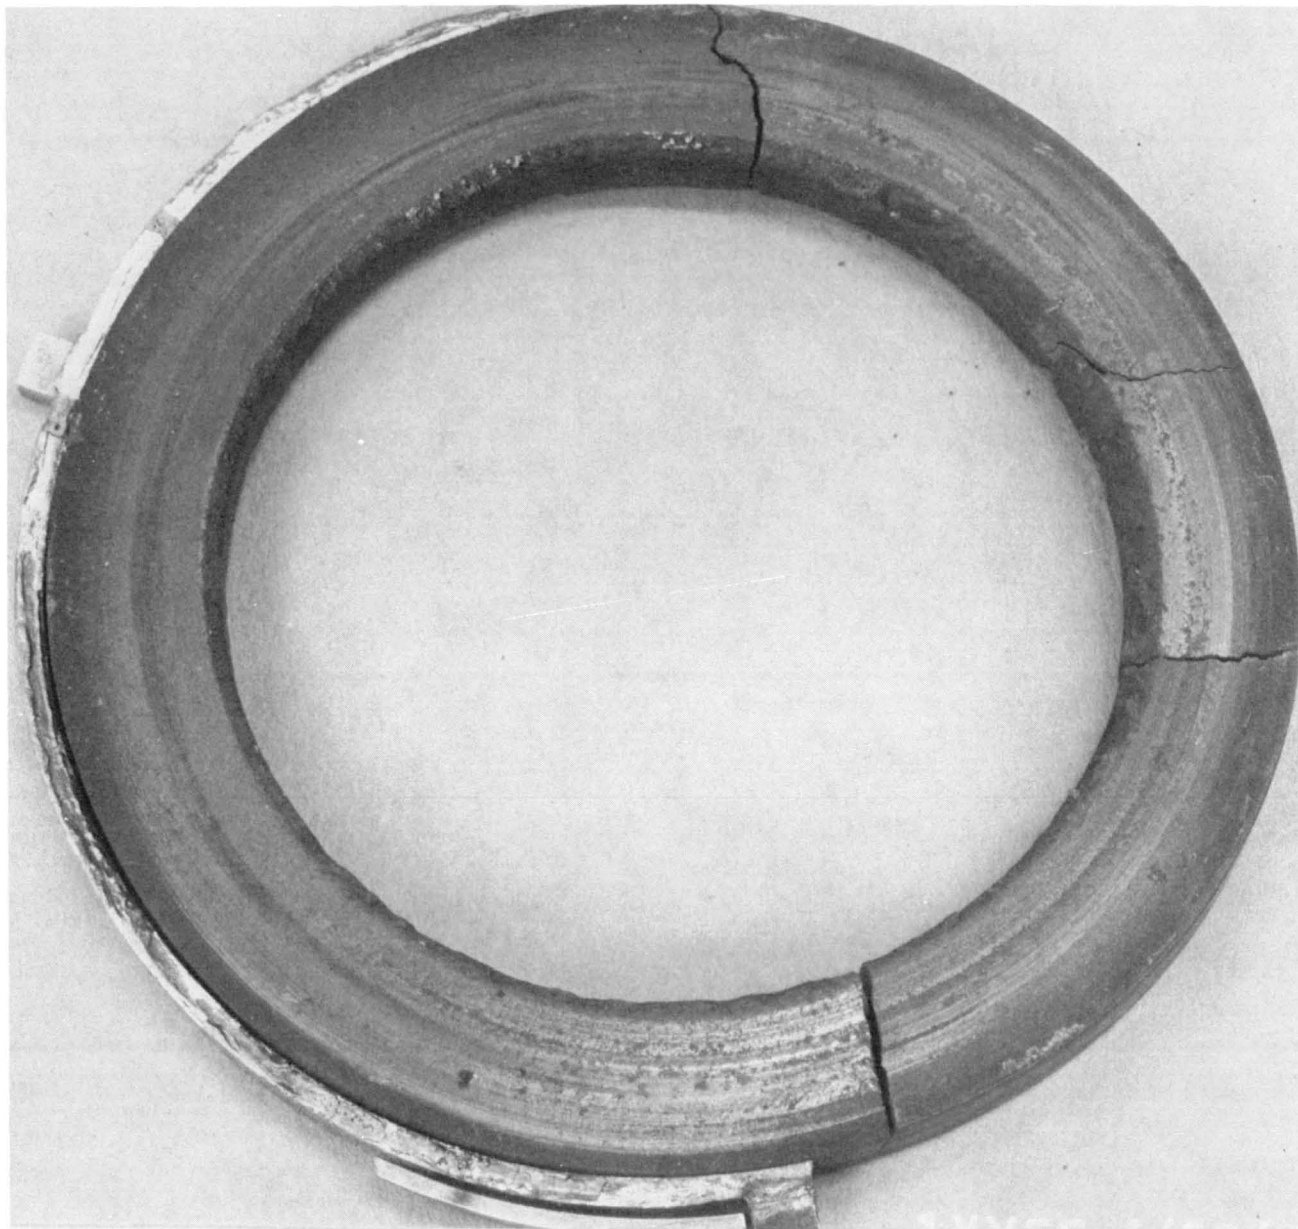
LOX Seal Carbon Seal Ring Face, Posttest 176
